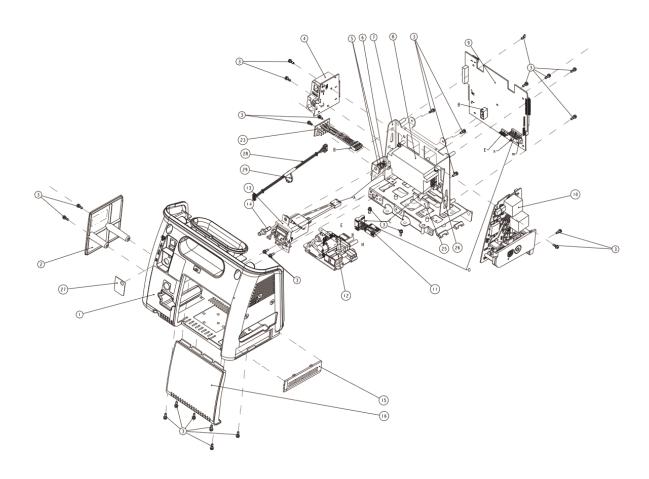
Front Case Assembly: PCB boards are items 4,9,10,12,13,23
